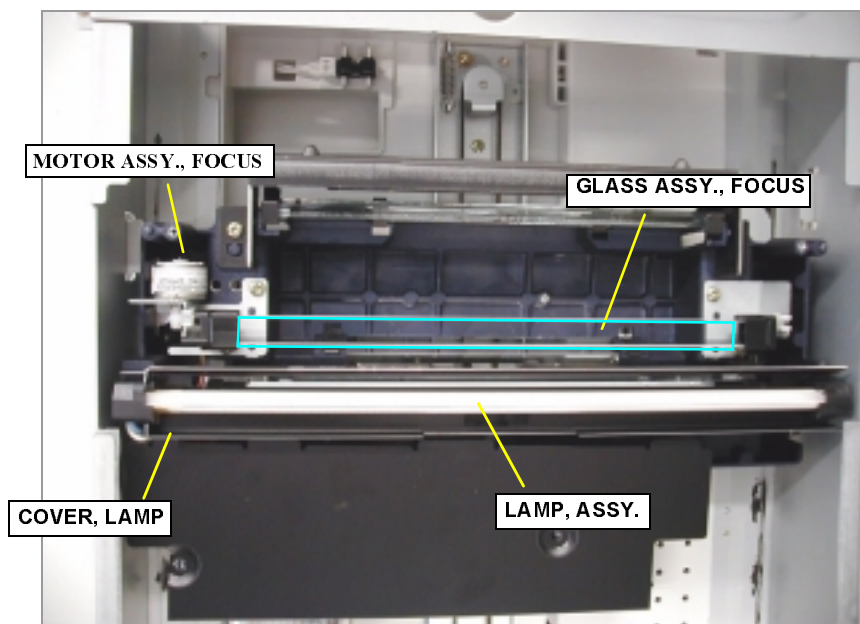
“GLASS ASSEMBLY, FOCUS” Removal (1)
